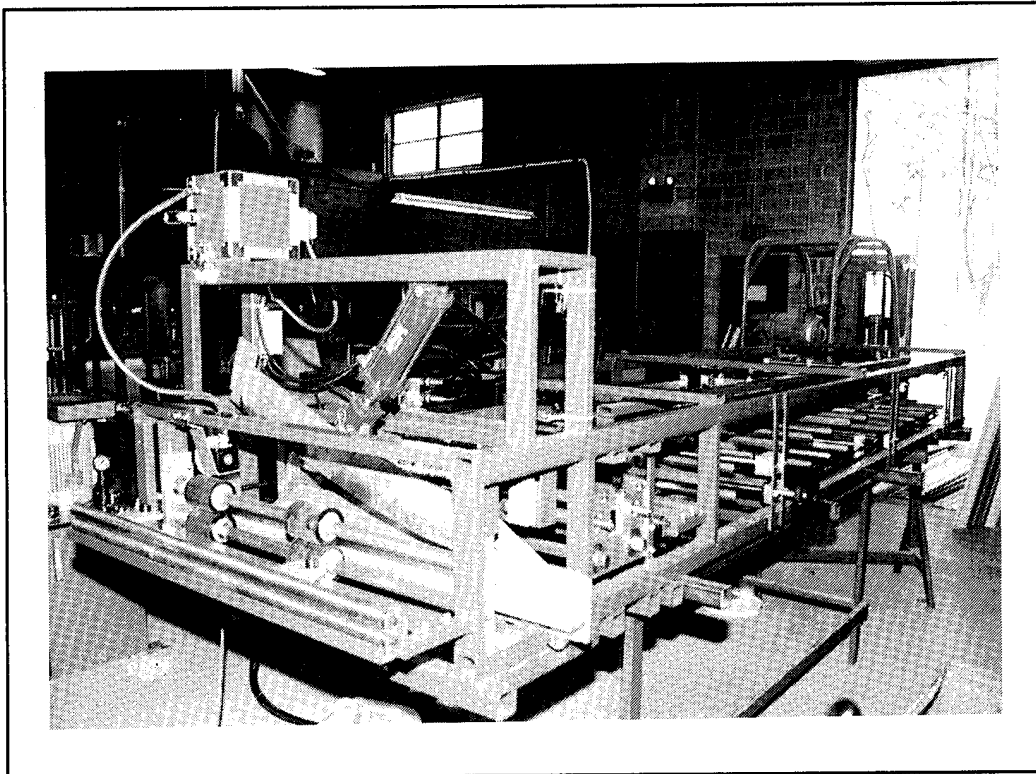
Prototype roll-forming equipment to fabricate the "hourglass" studs.
